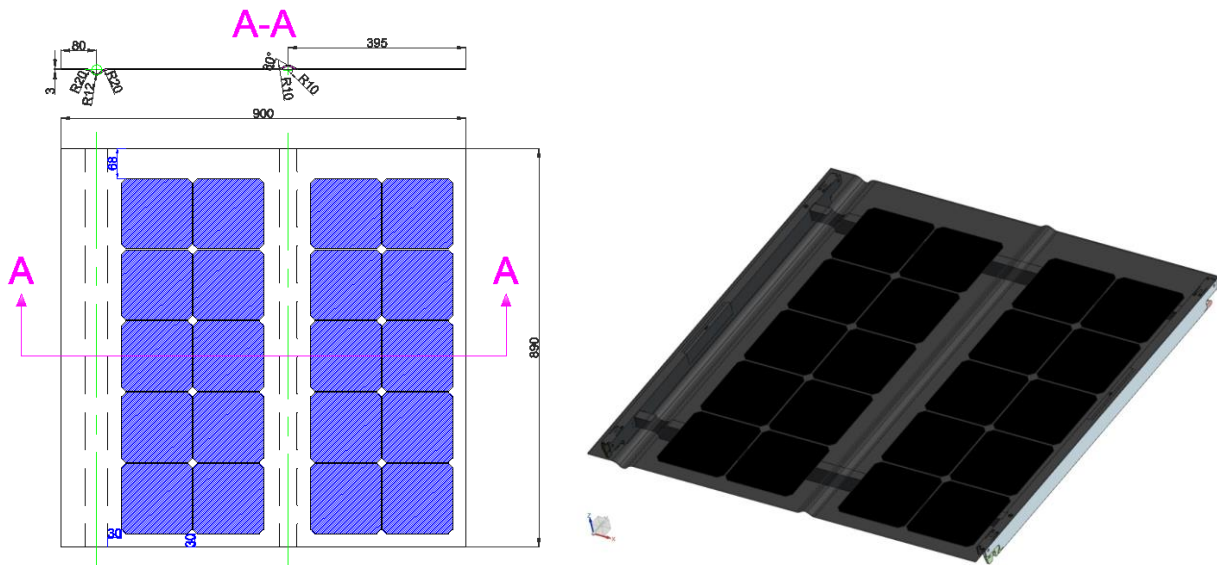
Geometry and dimensions of the real size prototype for testing based on construction standards
